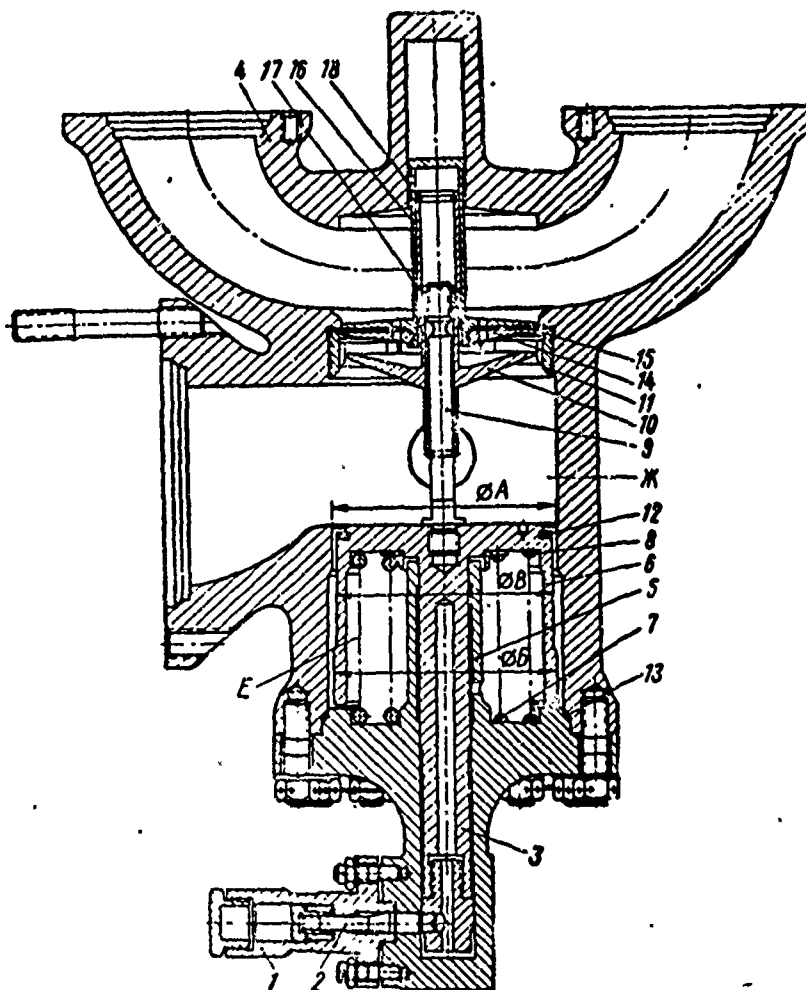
Explosive valve of the lock-pin type: 1 - housing of pin; 2 - pin; 3 - shank; 4 - housing; 5 - cover; 6 - valve; 7, 8 - springs; 9 - explosive bolt; 10 - guide; 11 - seat; 12 - seal; 13 - rubber seal ring; 14 - disk; 15 - diaphragm; 16 - sleeve; 17 - nut; 18 - stop ring; E, M - cavities.
